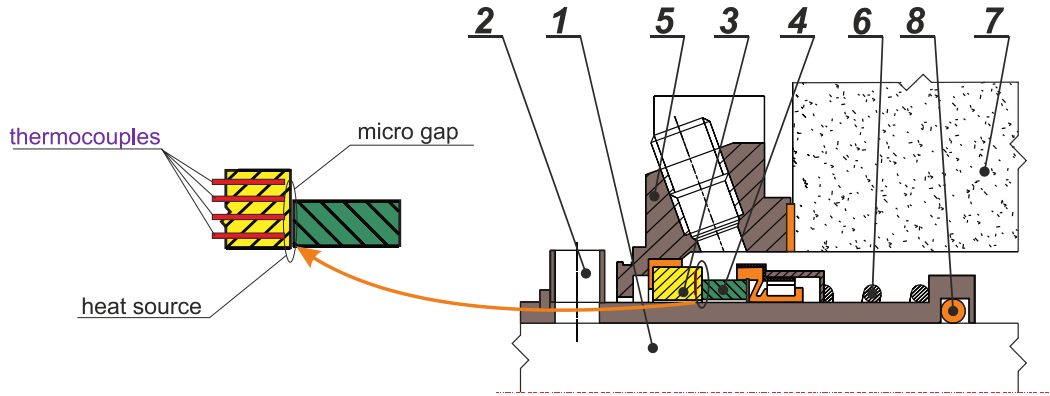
Diagram of the non-contacting face seal: 1 – shaft, 2 – steady pin, 3 – stator, 4 – rotor, 5 – housing of mechanical seal, 6 – spring, 7 – device housing, 8 - O-ring.
